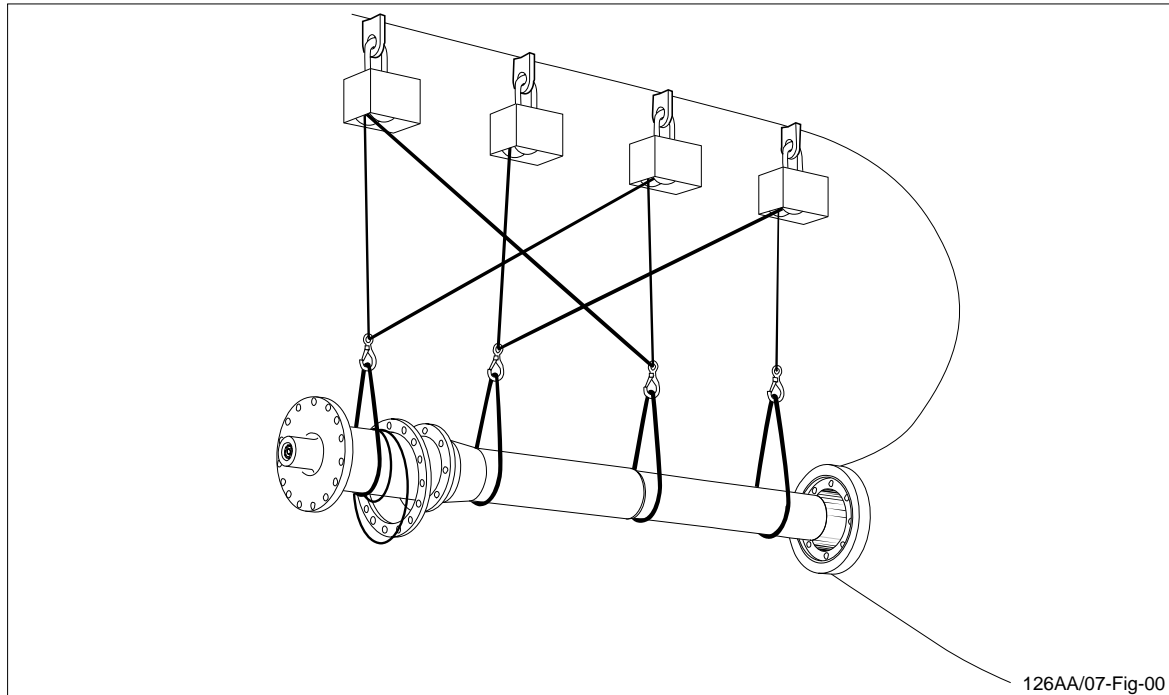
Insertion of propeller shaft with necessary hub fittings and aft stern tube seal placed on the shaft.
